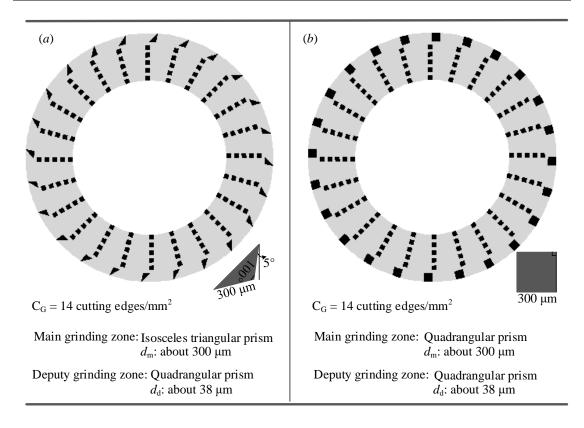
Design of binderless diamond gringing wheels (a) I and (b) II
